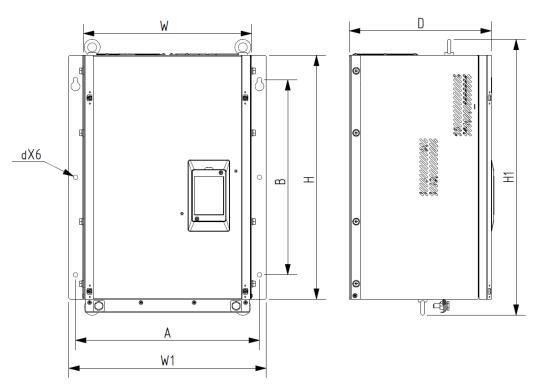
Appearance and Dimensions of CA300 Drive (132/160kW)
